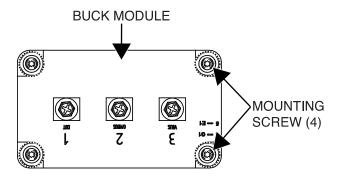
Buck / boost module mounting orientation and mounting screw locations
